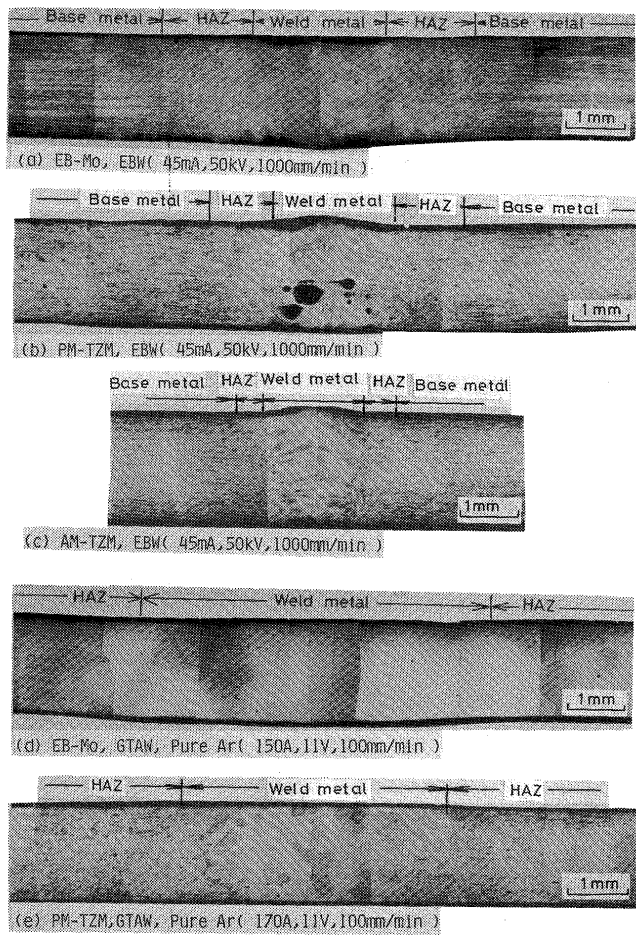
Macrostructures on cross-section of welds of EB-Mo, PM-TZM and AM-TZM for various welding heat input
